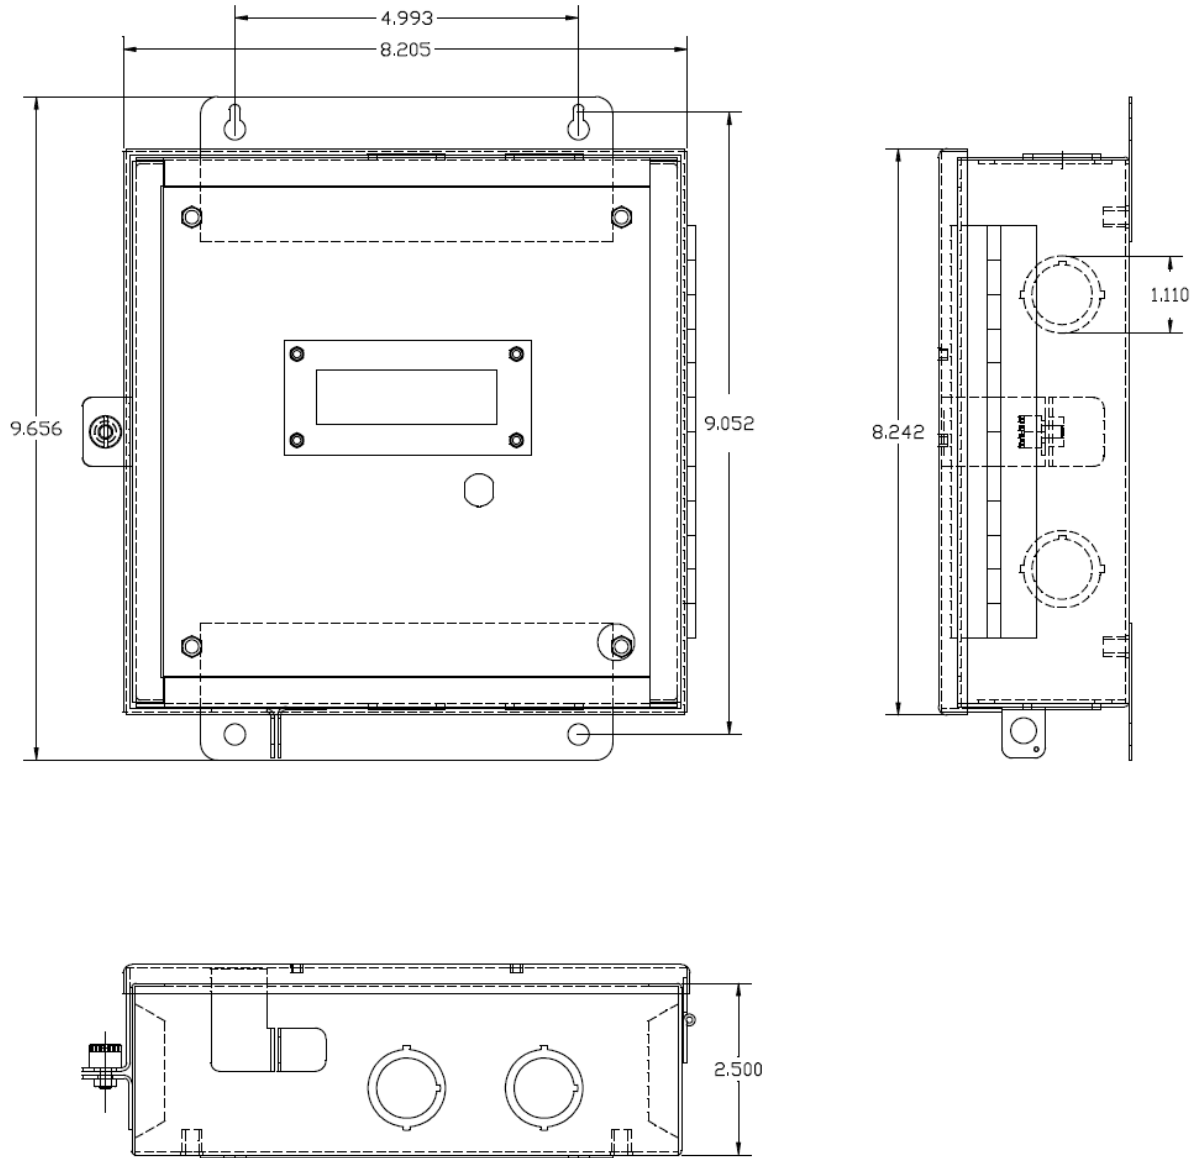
Series 3300/3500 Indoor Steel Enclosure Dimensions, in Inches
